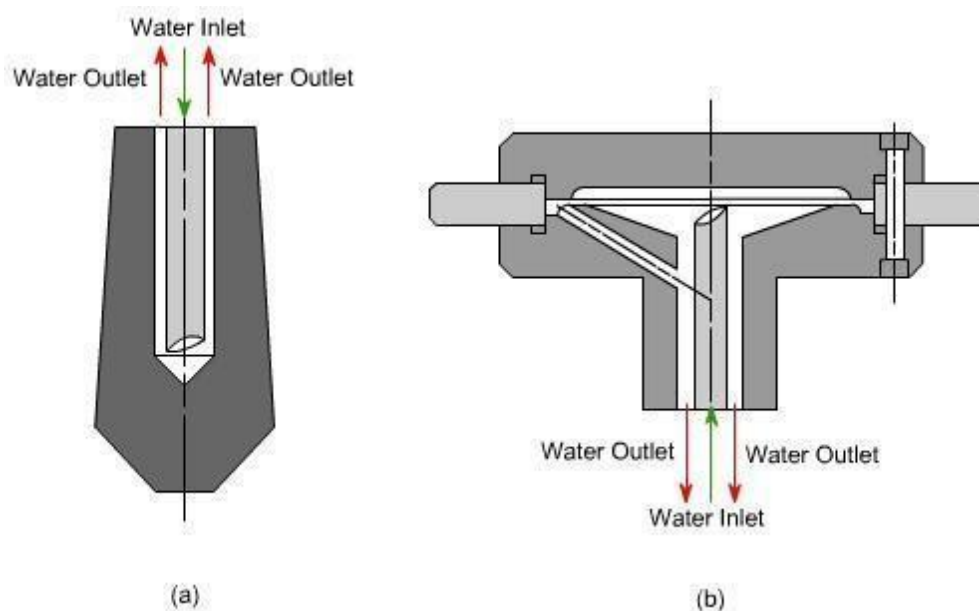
Water Cooling of Electrodes (a) Spot Welding (b) Seam Welding.
